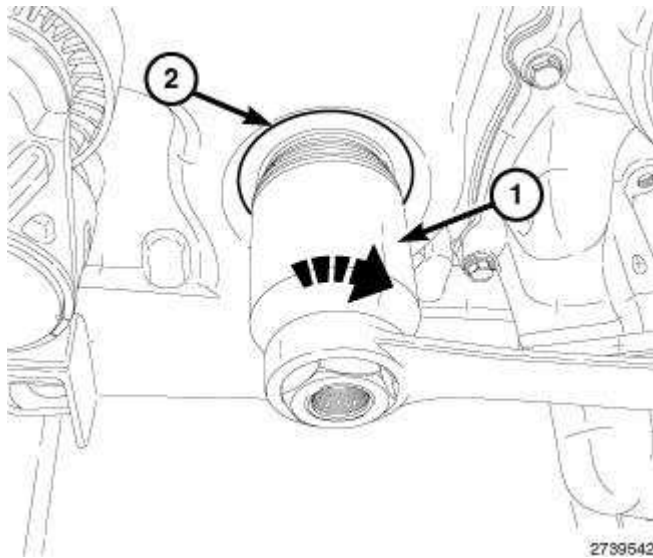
Seal Remover & Front Crankshaft Oil Seal
